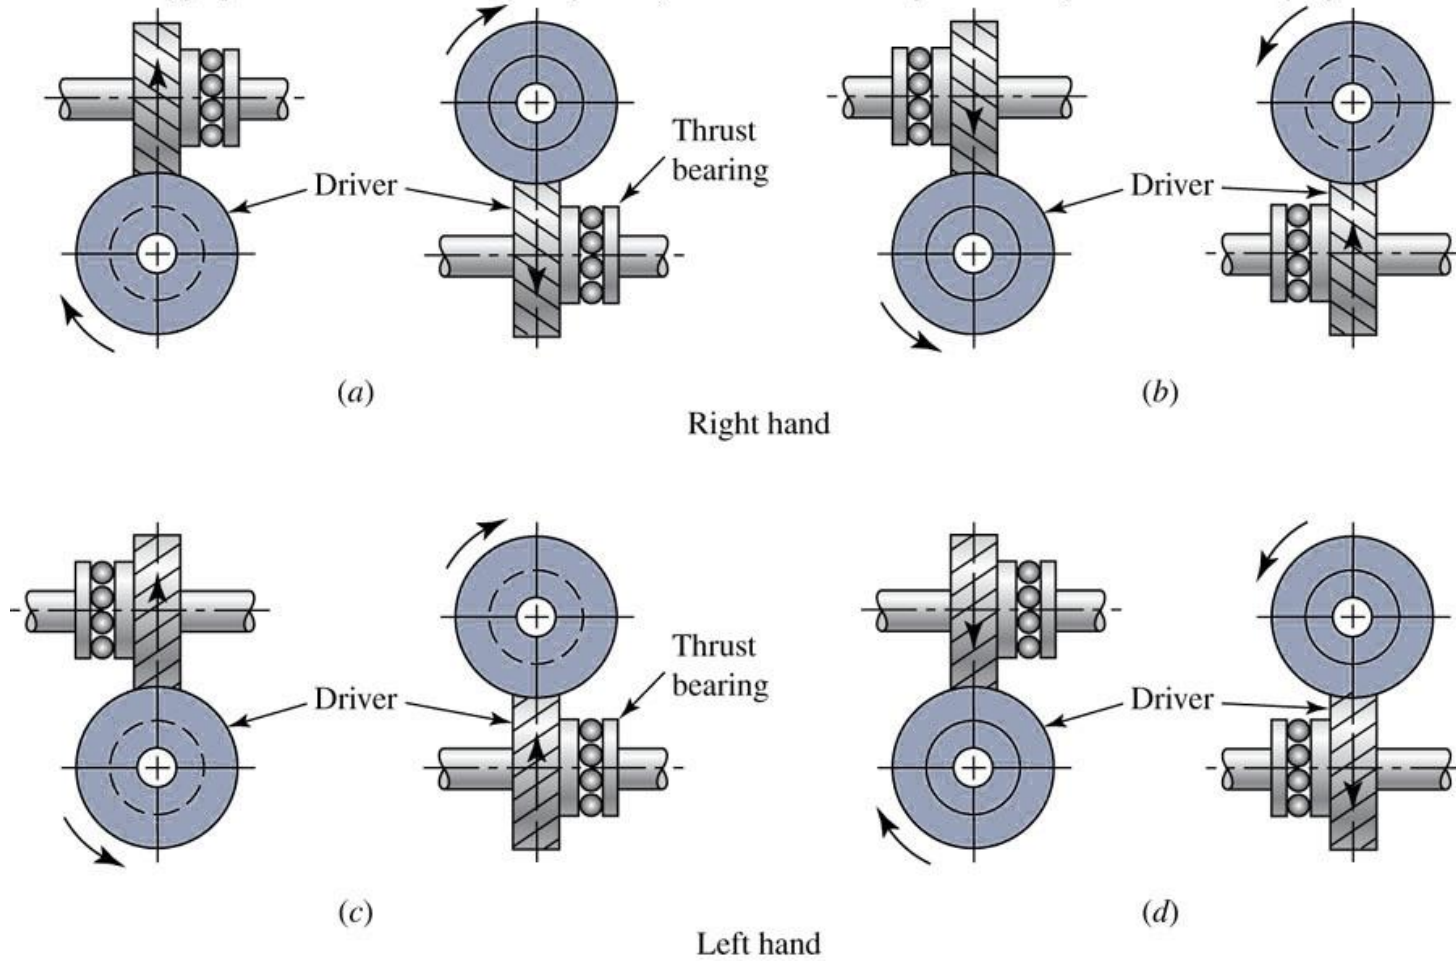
Thrust, rotation, and hand relations for crossed helical gears.
